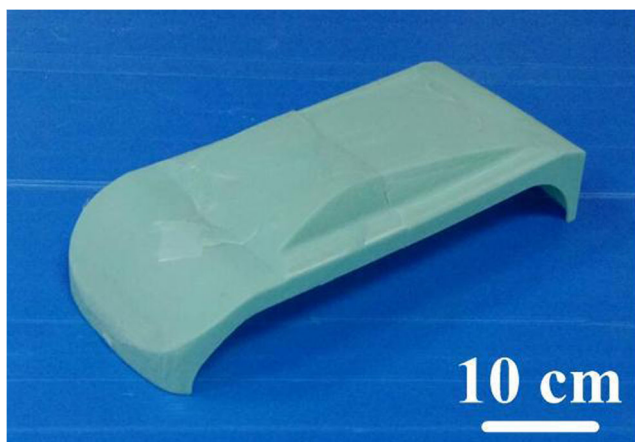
A typical large molded part fabricated by an injection mold with conformal cooling channels
